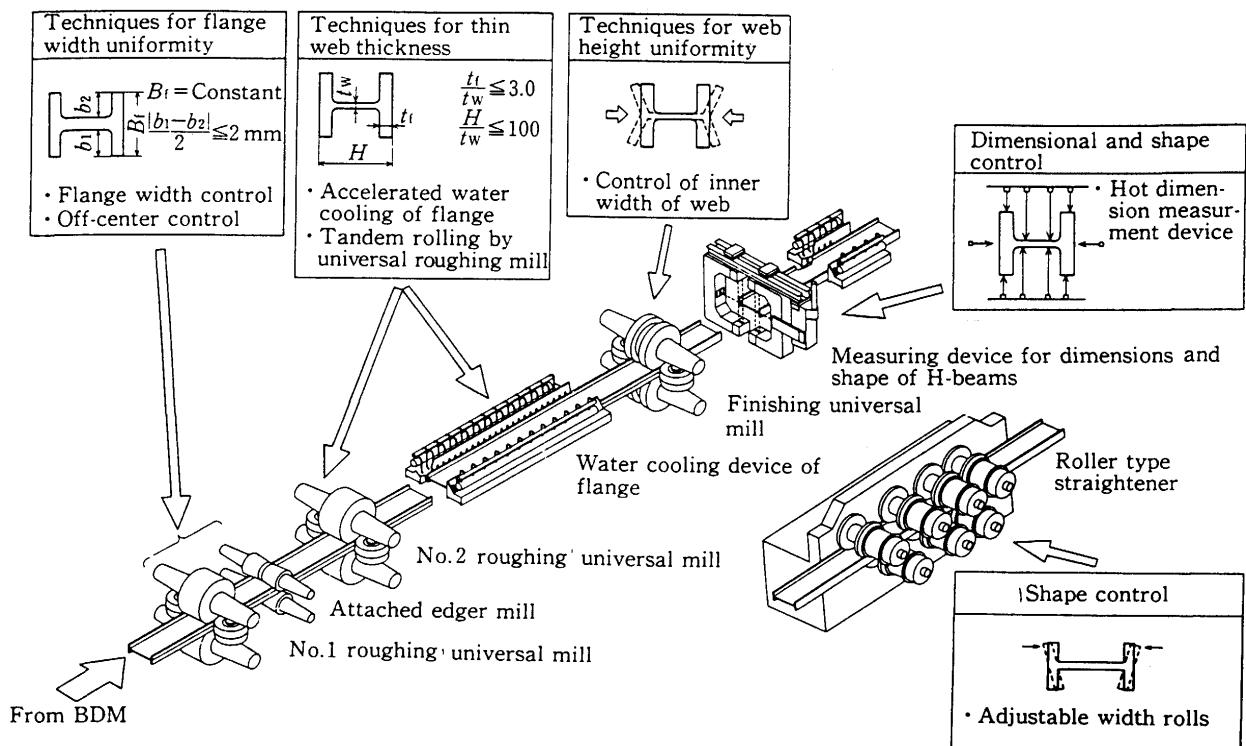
Production process for fixed outer dimension H-shape and technical subject.
